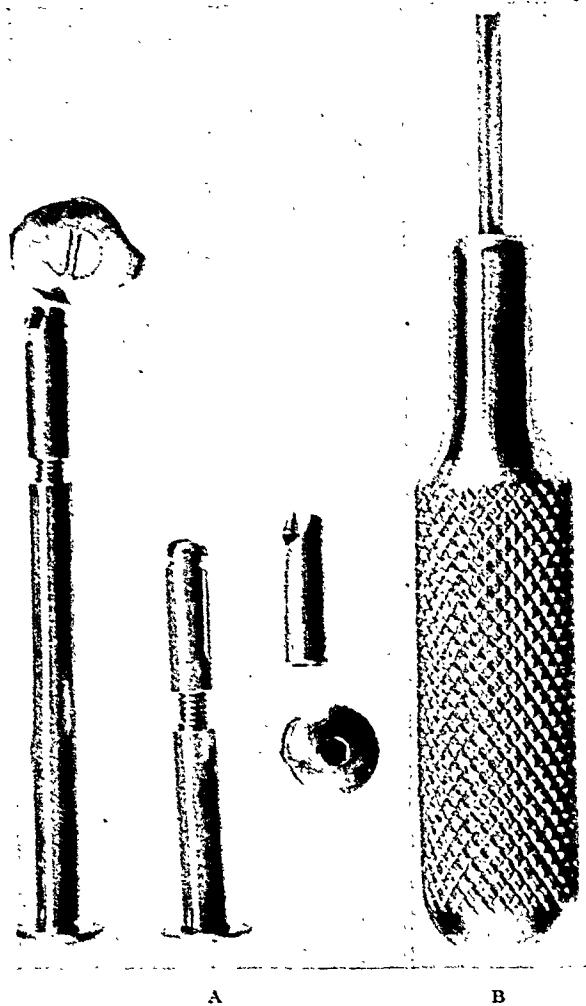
A, illustrating fastener assembly and hexagonal socket in screw; B, hexagonal type screw driver.
